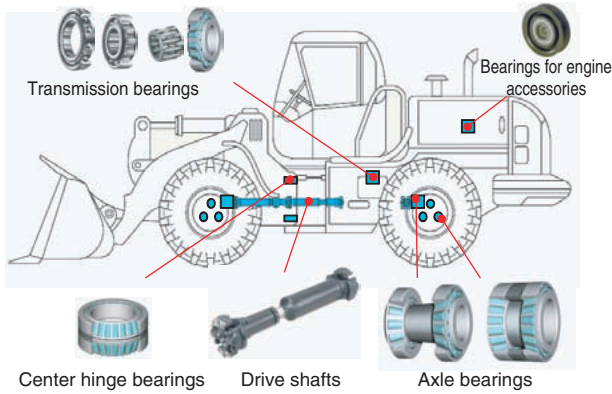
Bearing and drive shaft for agricultural and construction machinery
